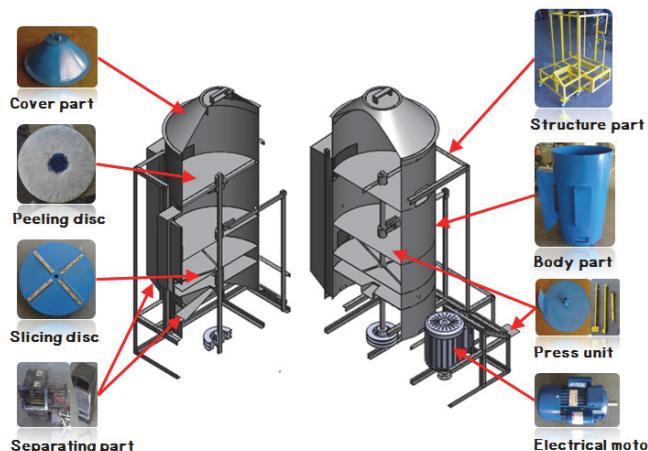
Drawing of peeling and size reducing machine for jackfruit seed
